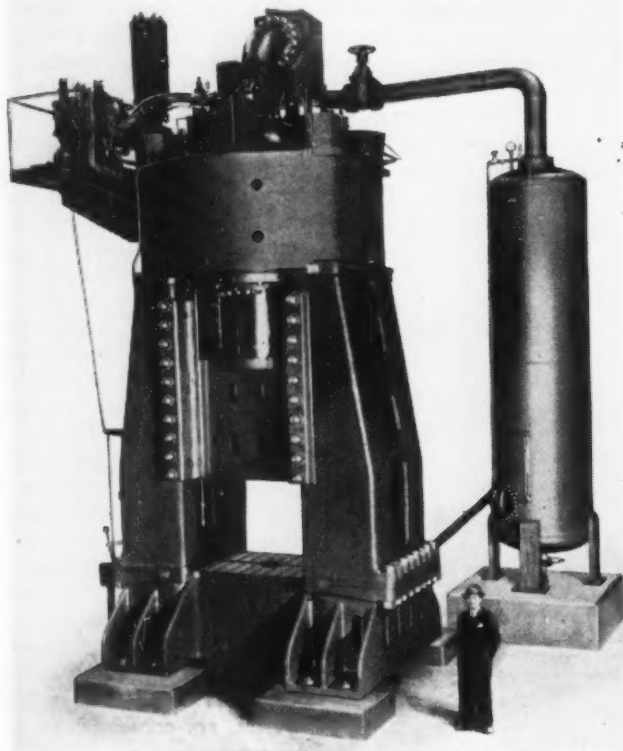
GIB-GUIDED HYDRAULIC FORGING PRESS
